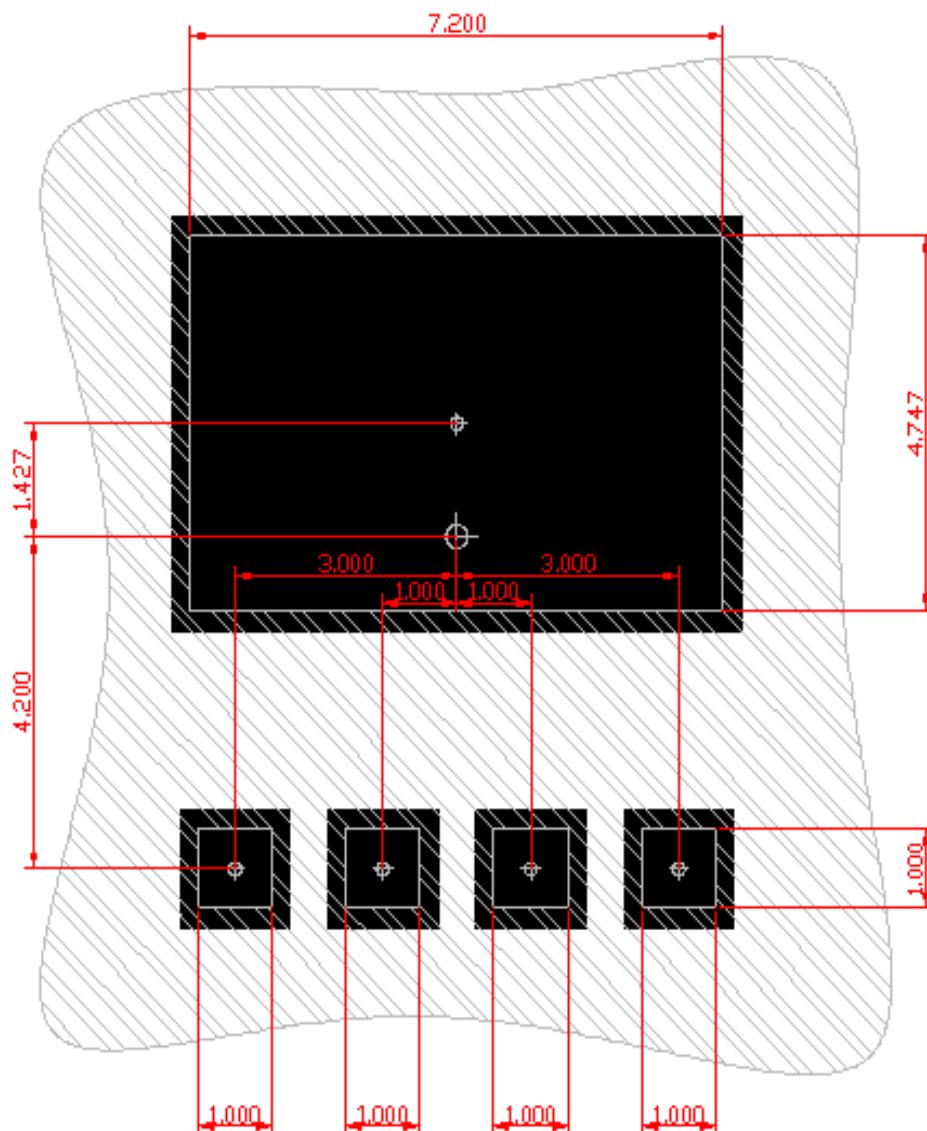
Recommended PCB pad design for reflow soldering of VDSO-4
